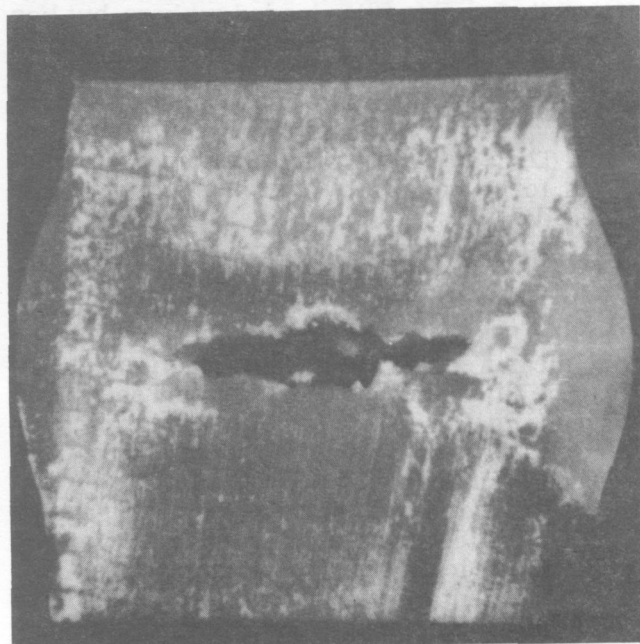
Specimen cut open to reveal internal center cracks after failure. Loading direction perpendicular to cracks.
